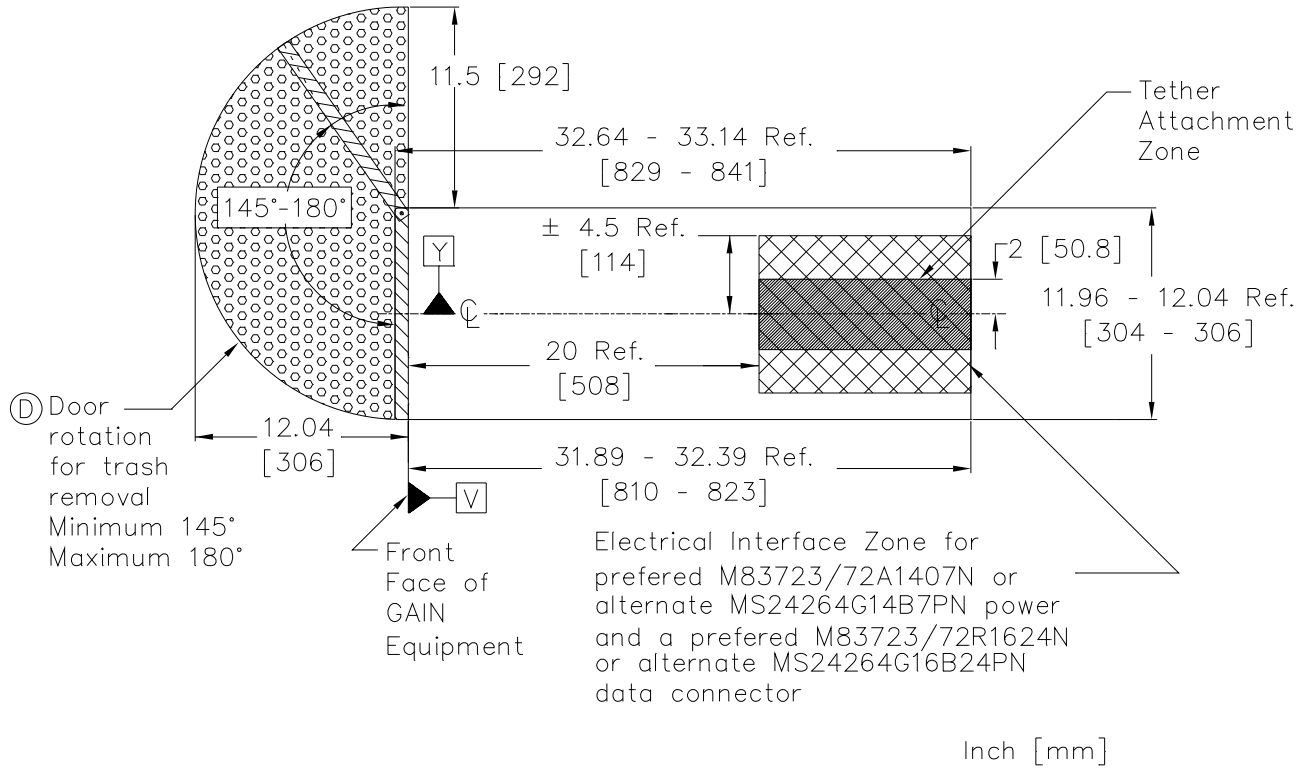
D – GAIN Size 3 Equipment Standard Dimensions Drawing – Plan View
